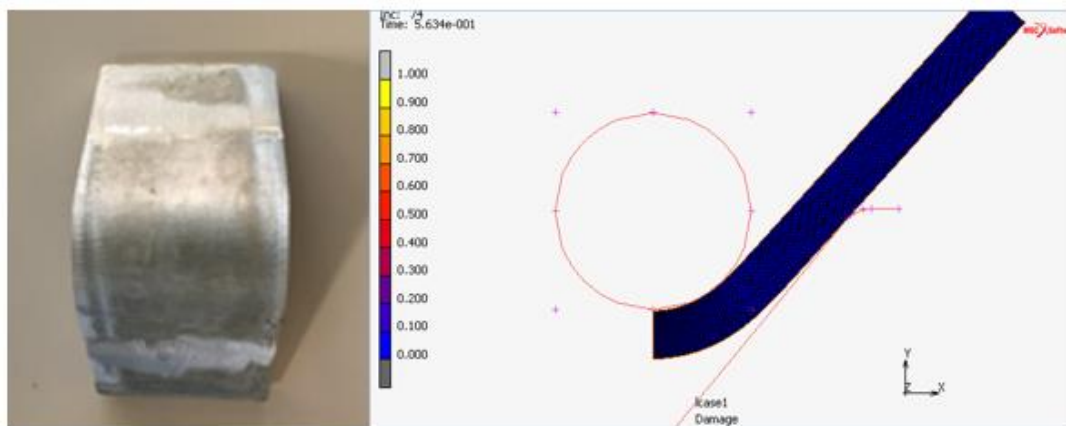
6mm Aluminium with R12mm – Test & Analysis
